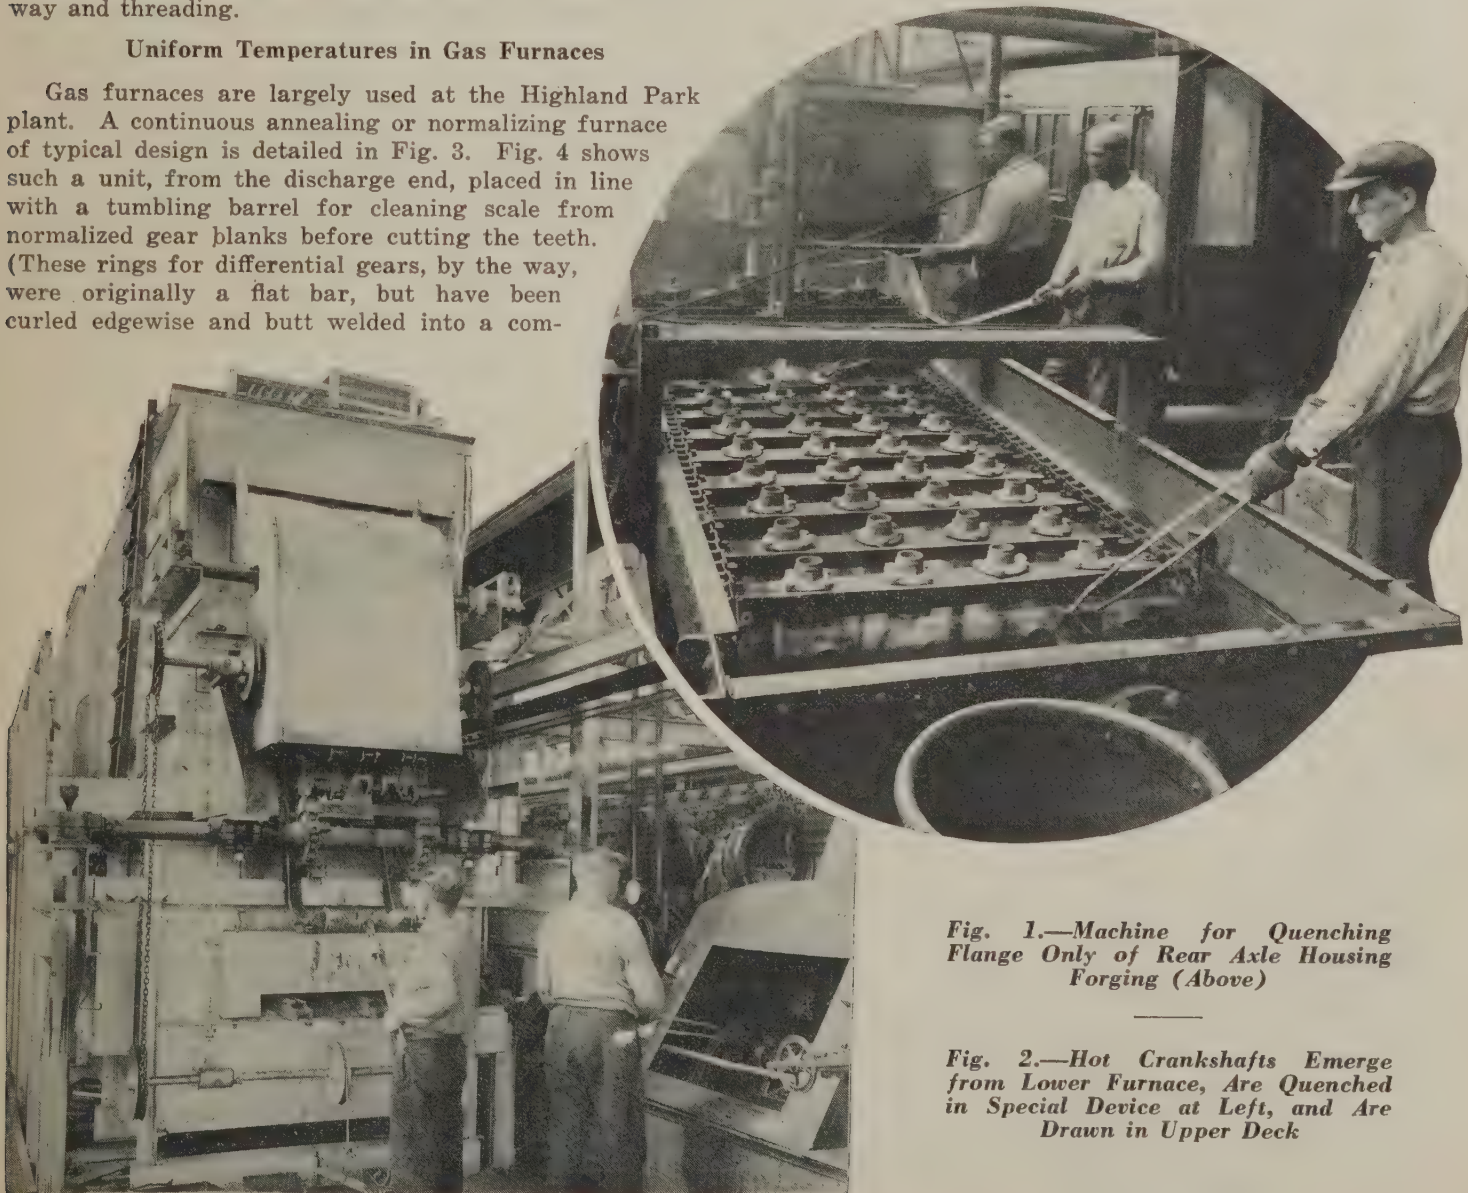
Machine for Quenching Flange Only of Rear Axle Housing Forging (Above)
